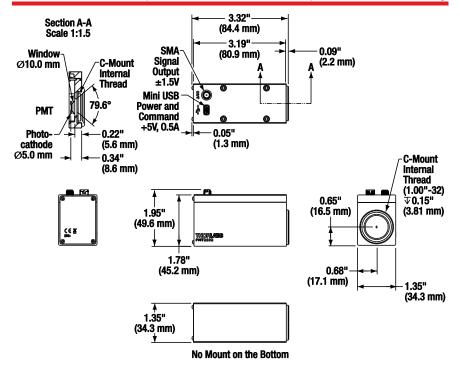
Mechanical Drawing of the PMT2102 Series PMT Housing
